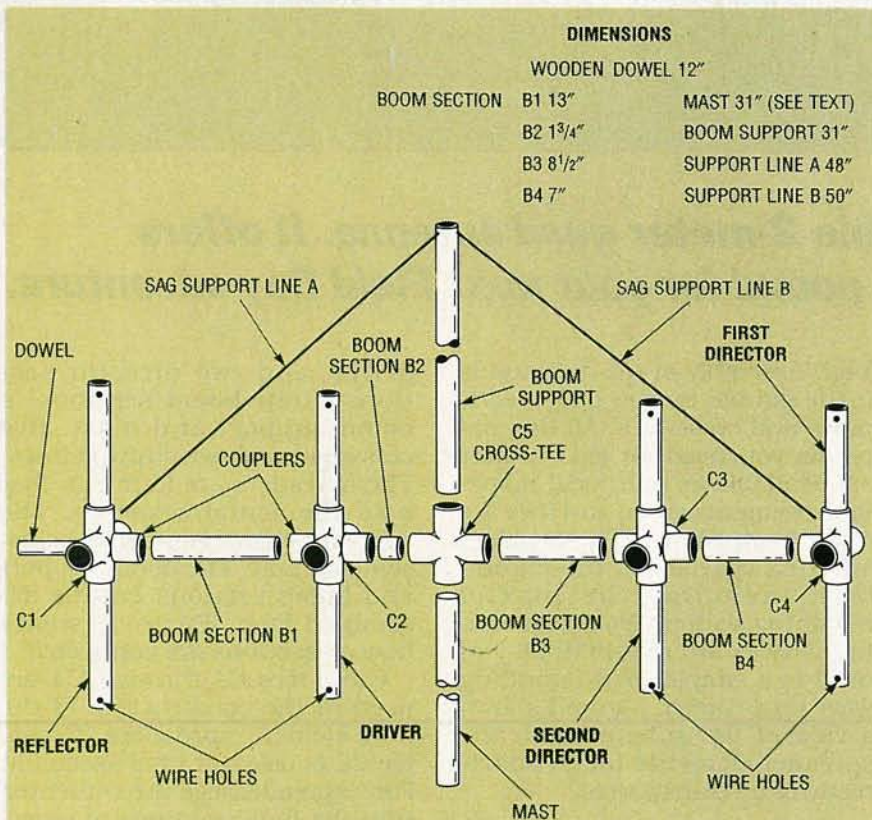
A SIDE VIEW OF THE SPREADER ELEMENTS, boom sections and boom support. The driver section is where the RG59/U coaxial cable is connected.
